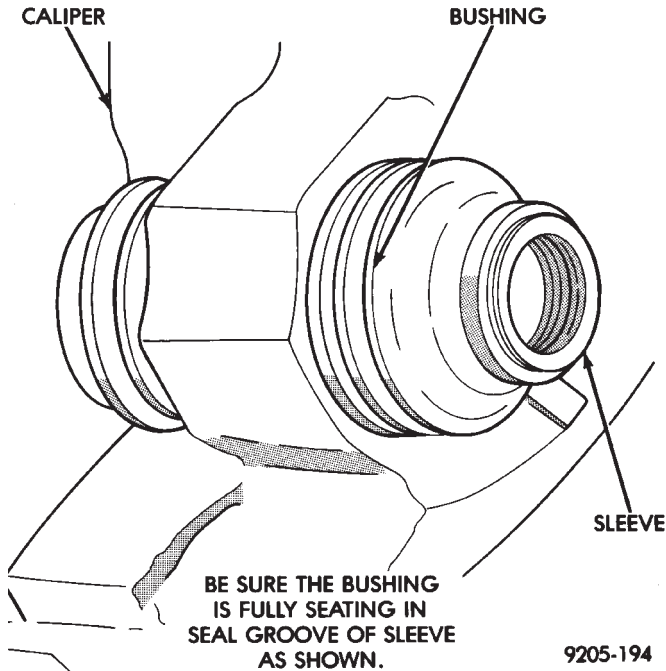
Correctly Installed Caliper Sleeve And Bushing
